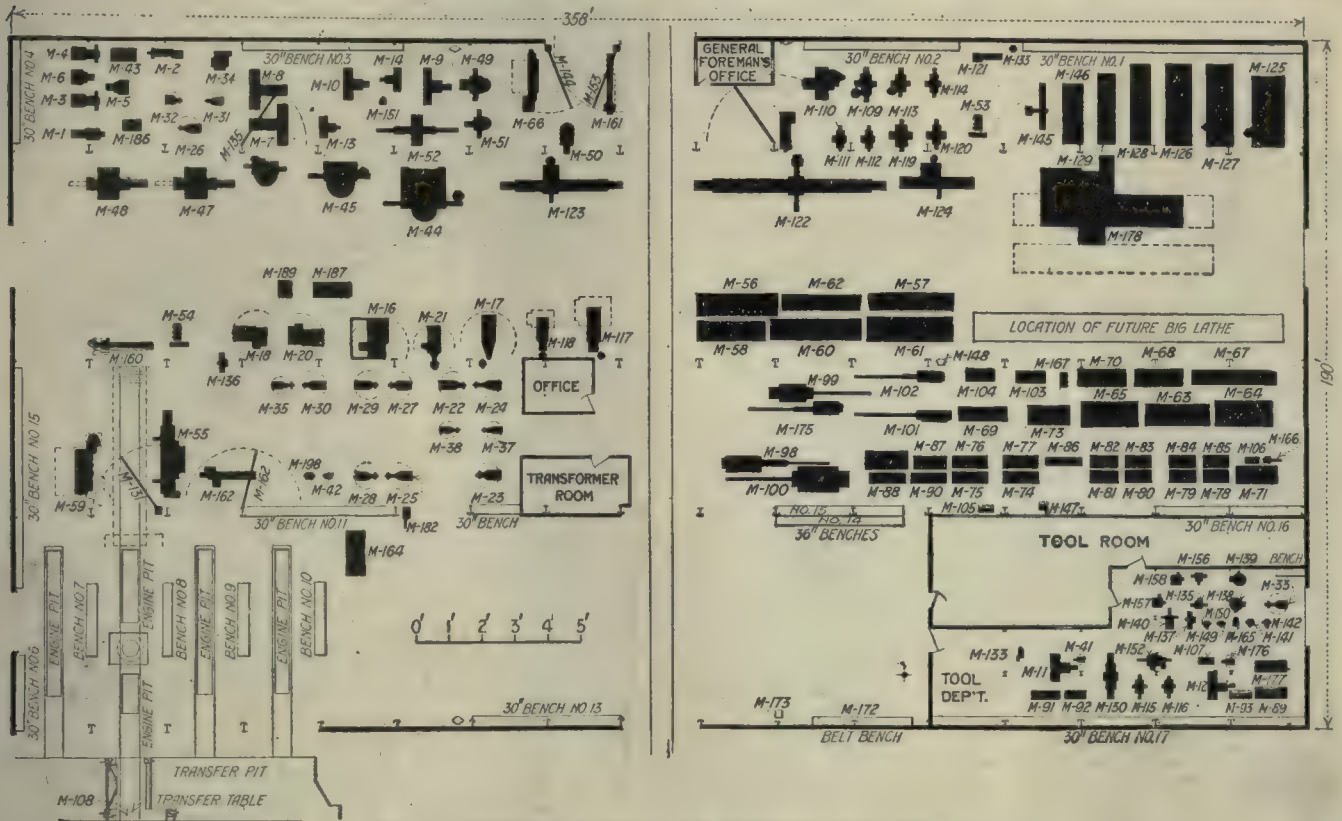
GENERAL LAYOUT OF MACHINE EQUIPMENT
